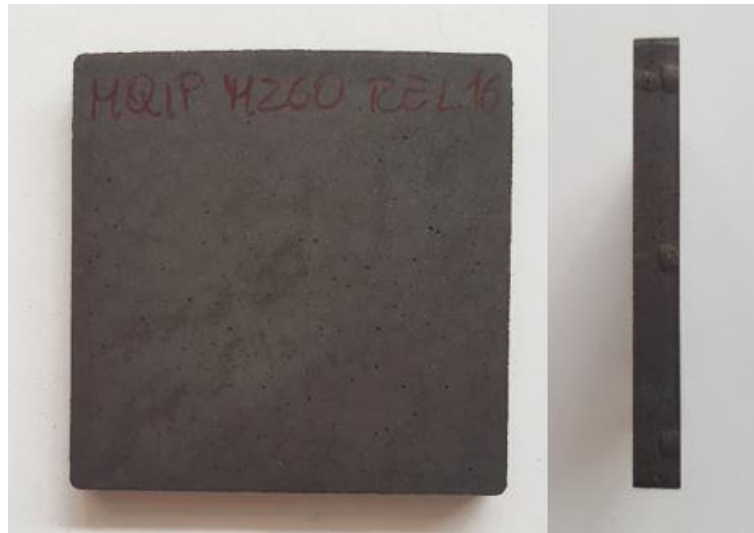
The molded form of MQIP M260 NdFeB Bonded magnets
